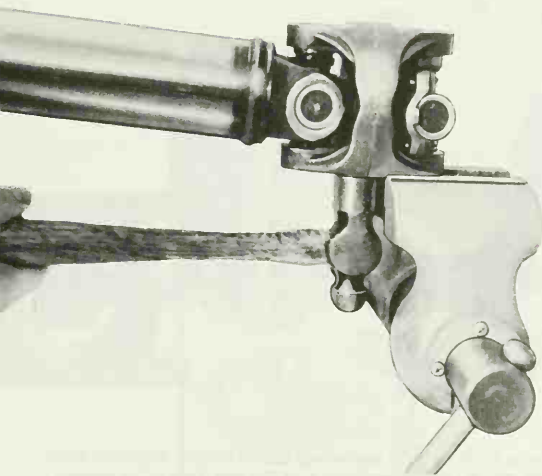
Removing the bearing cups. (GMC Truck and Coach Division of General Motors Corporation)
